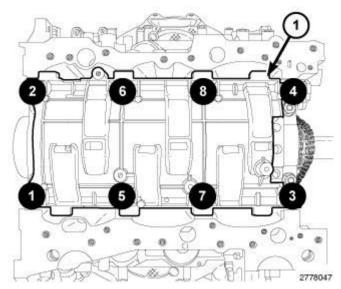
Main Bearing Cap Bolts From Windage Tray Removal Sequence Courtesy of CHRYSLER GROUP, LLC
